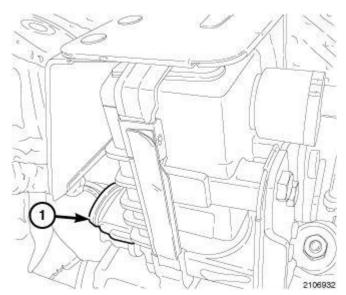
Turbocharger Module Connector Courtesy of CHRYSLER LLC
